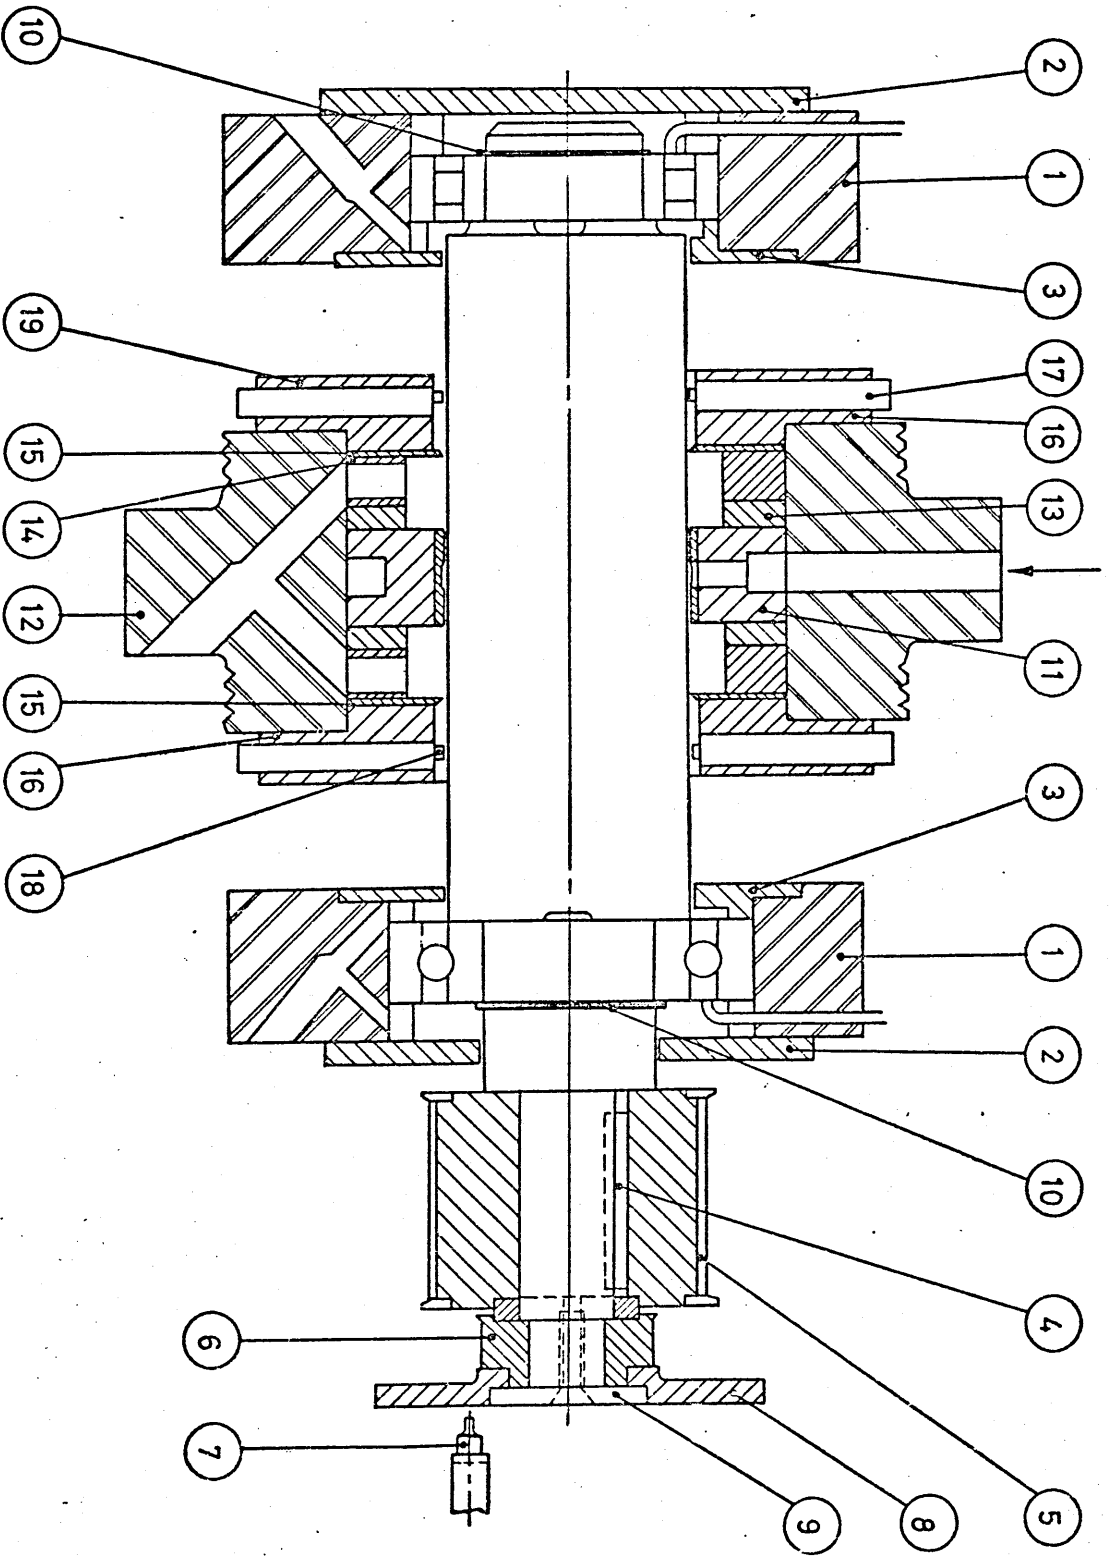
TEST AND SLAVE BEARING CONSTRUCTION.
